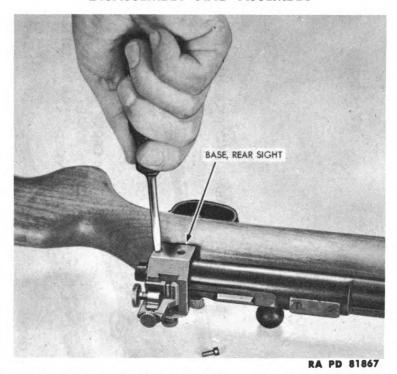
Removing Rear Sight From Stevens Rifle, Cal. .22, Model 416-2
